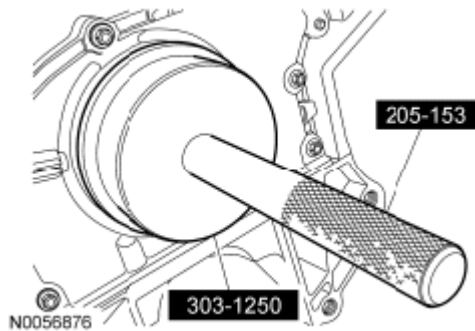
Identifying Rear Main Seal Installer And Handle
